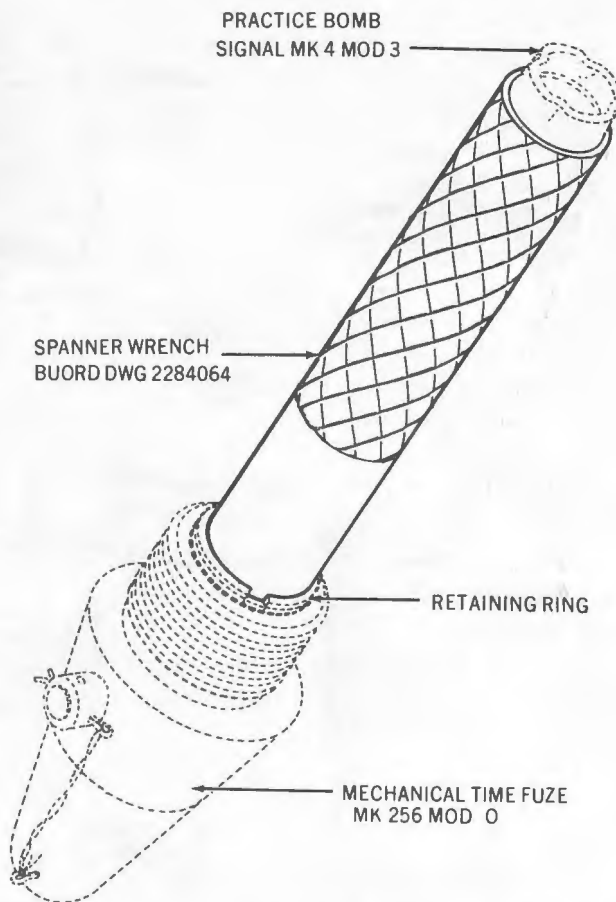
D. Mechanical Time Fuze, Mk 256 Mod 0, and Practice Bomb Signal Mk 4 Mod 3, Assembly.
